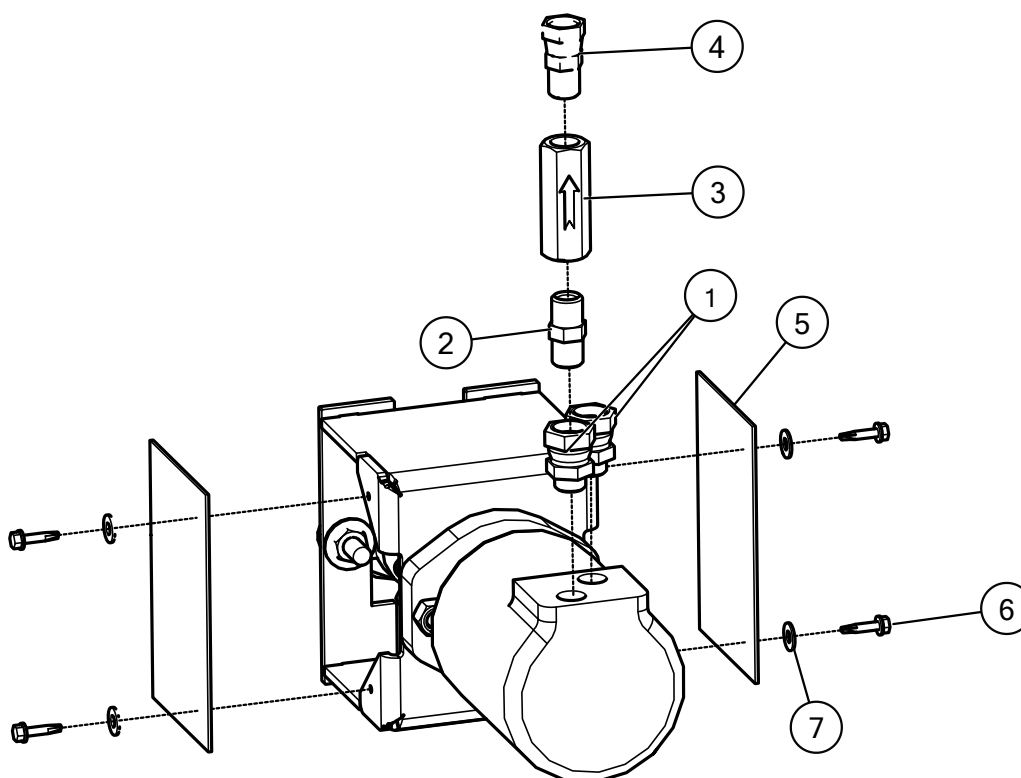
Installing the Hydraulic MotorInstall the Hydraulic Fittings and Coupler Guard
